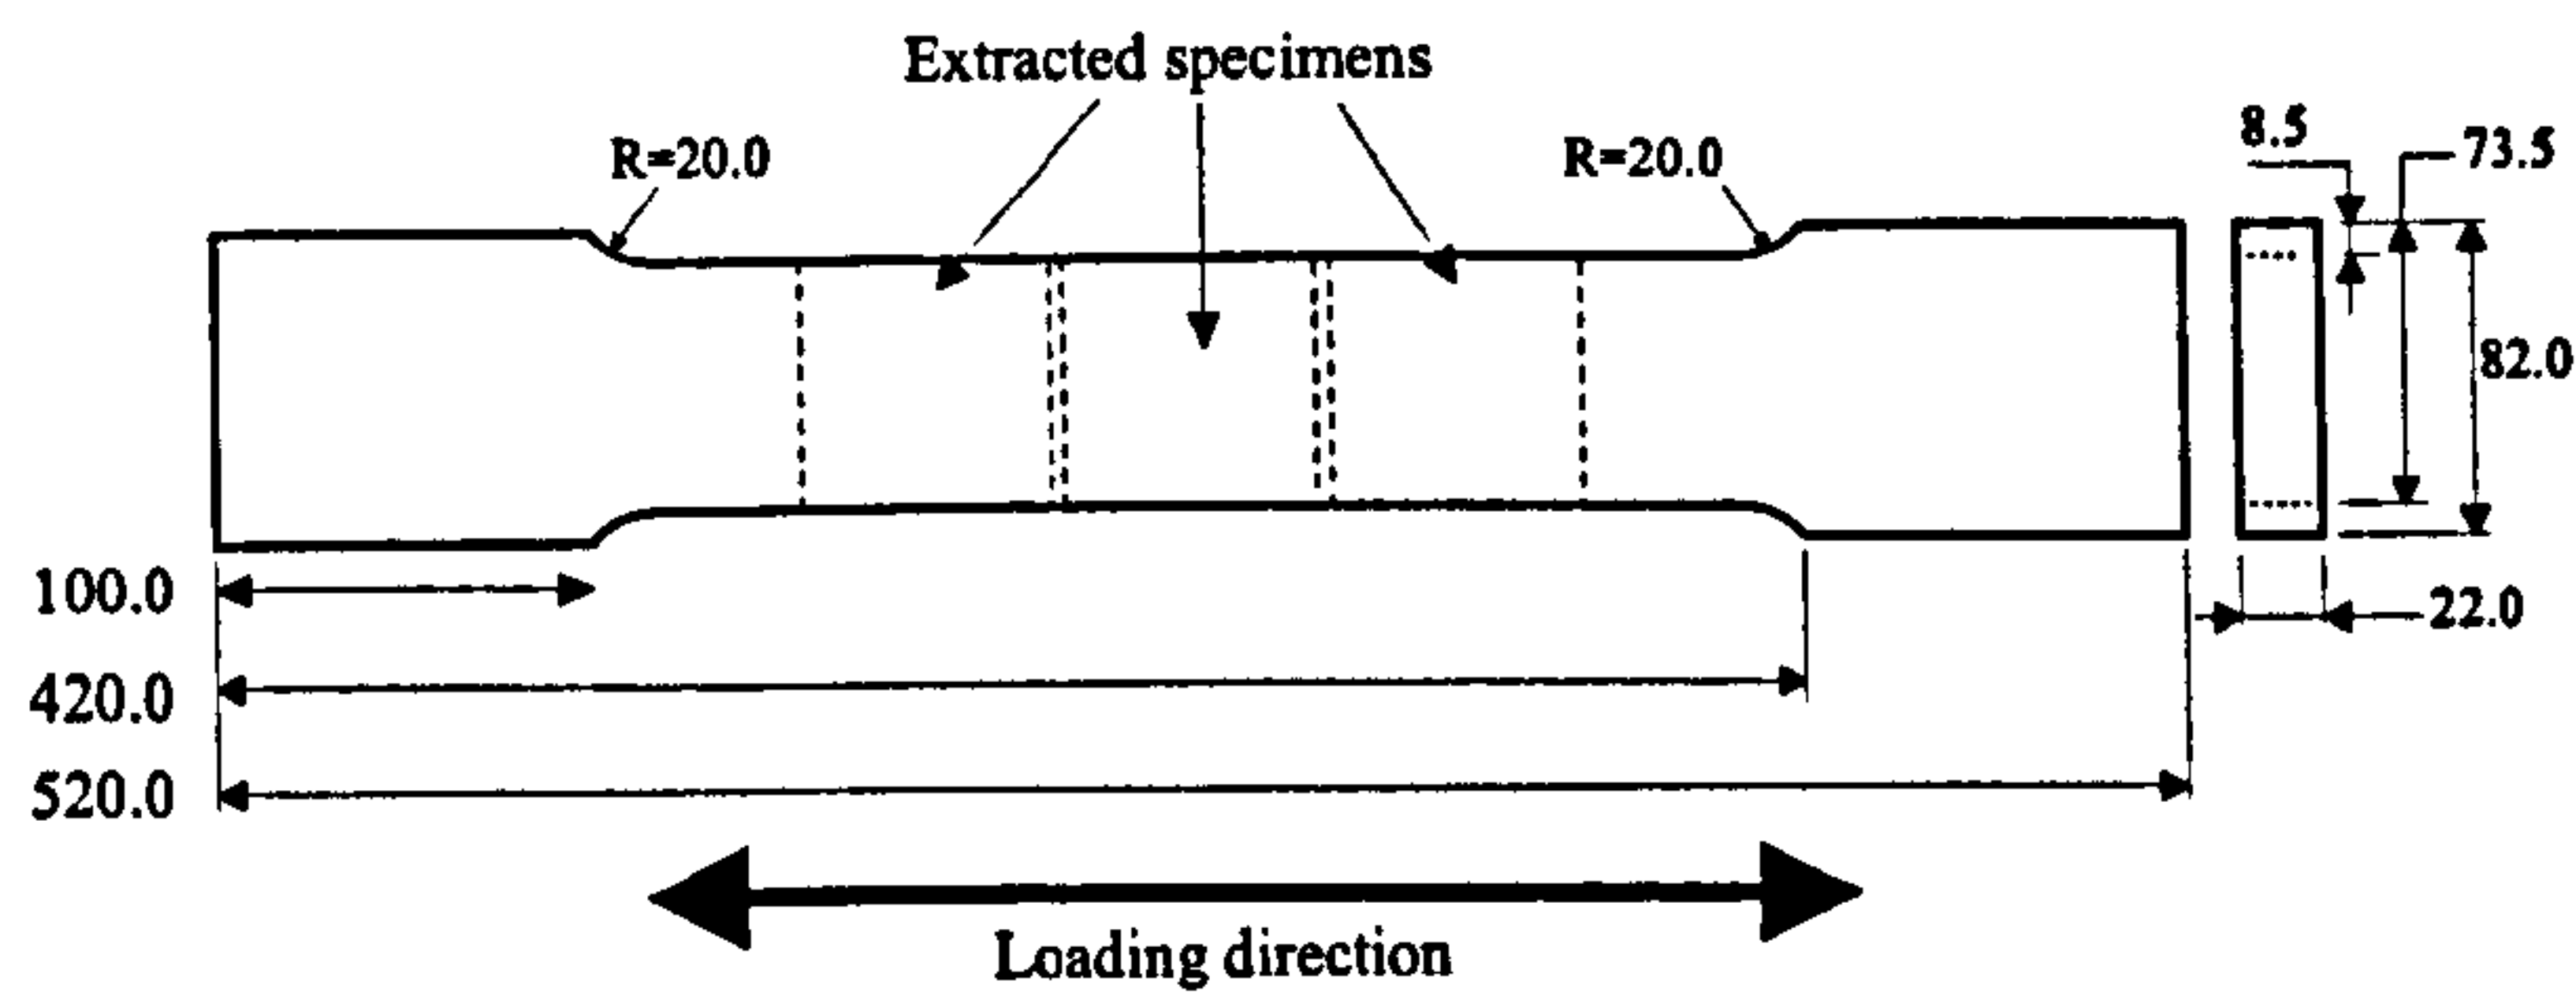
Large tensile specimens, used to generate uniform plastic strain in extracted 'blanks'. Dimensions in mm.
